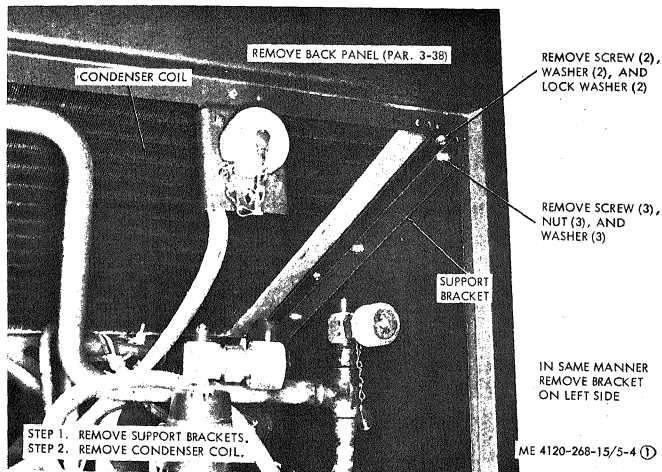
Condenser Coil, removal and installation (Sheet 1 of 2).
